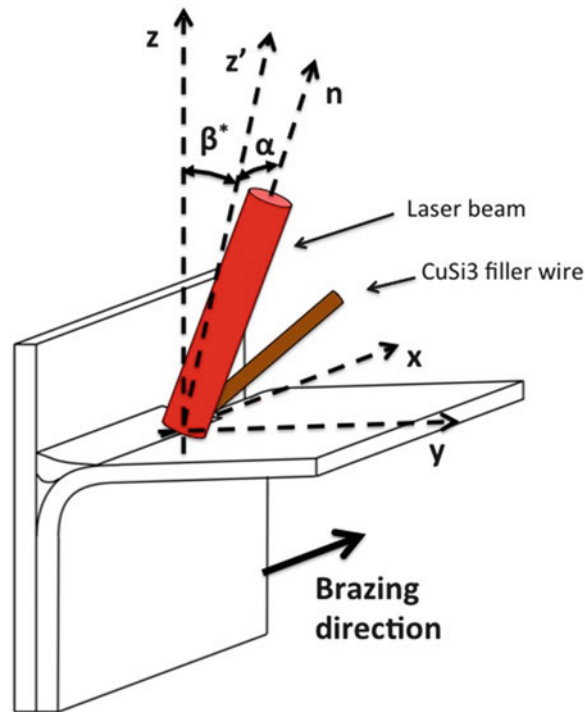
Sketch of the laser welding-brazing operation with the filler wire
